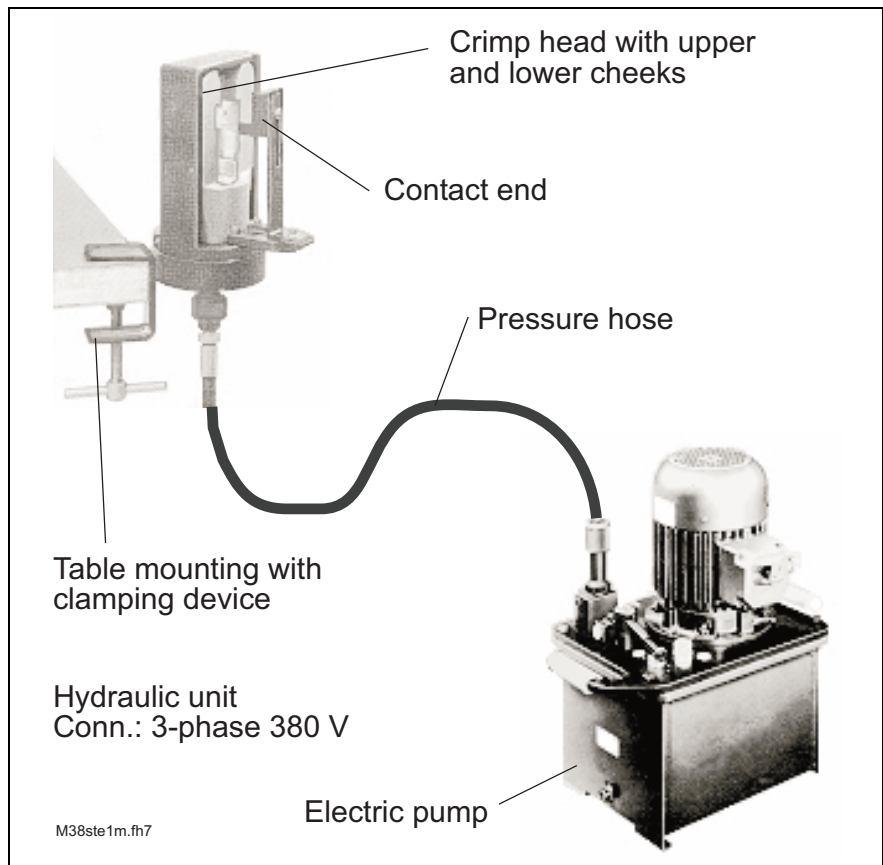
Crimping tool for power contacts INS0380 to INS0386 with hydraulic device
